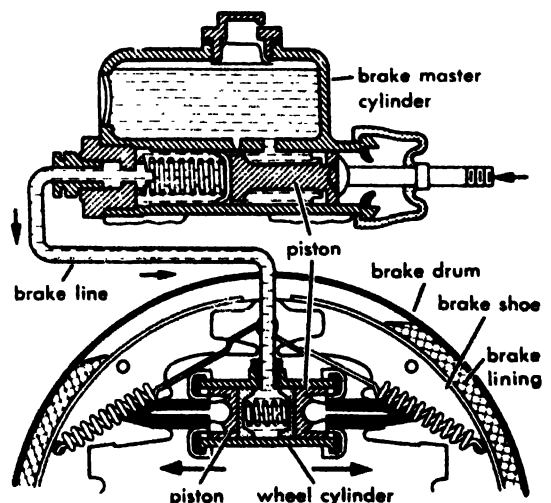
Schematic view of hydraulic braking system for one wheel on an automobile. Brakes are shown applied. Large arrows indicate motions of pistons, small arrows the direction of motion of hydraulic fluid. (Pontiac Motor Division, General Motors Corp.)
